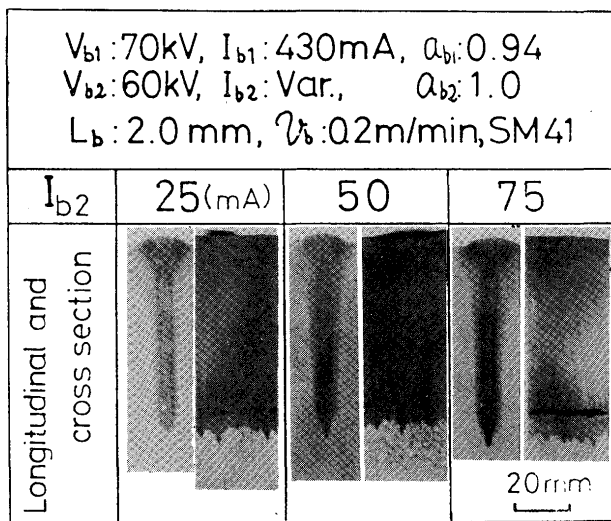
Example of transverse and cross sections of beads by retreating angle TEB welding.
